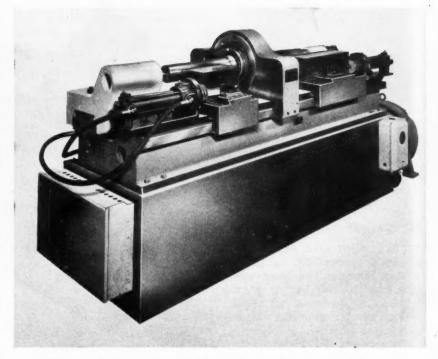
Benjamin Automatic Double-end Shaft-turning Machine
